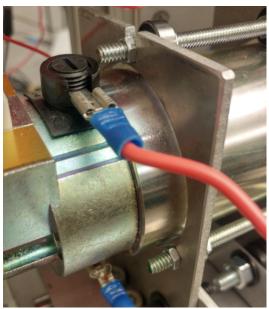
View of the Torque Bearing Subassembly incorporating threaded rods
